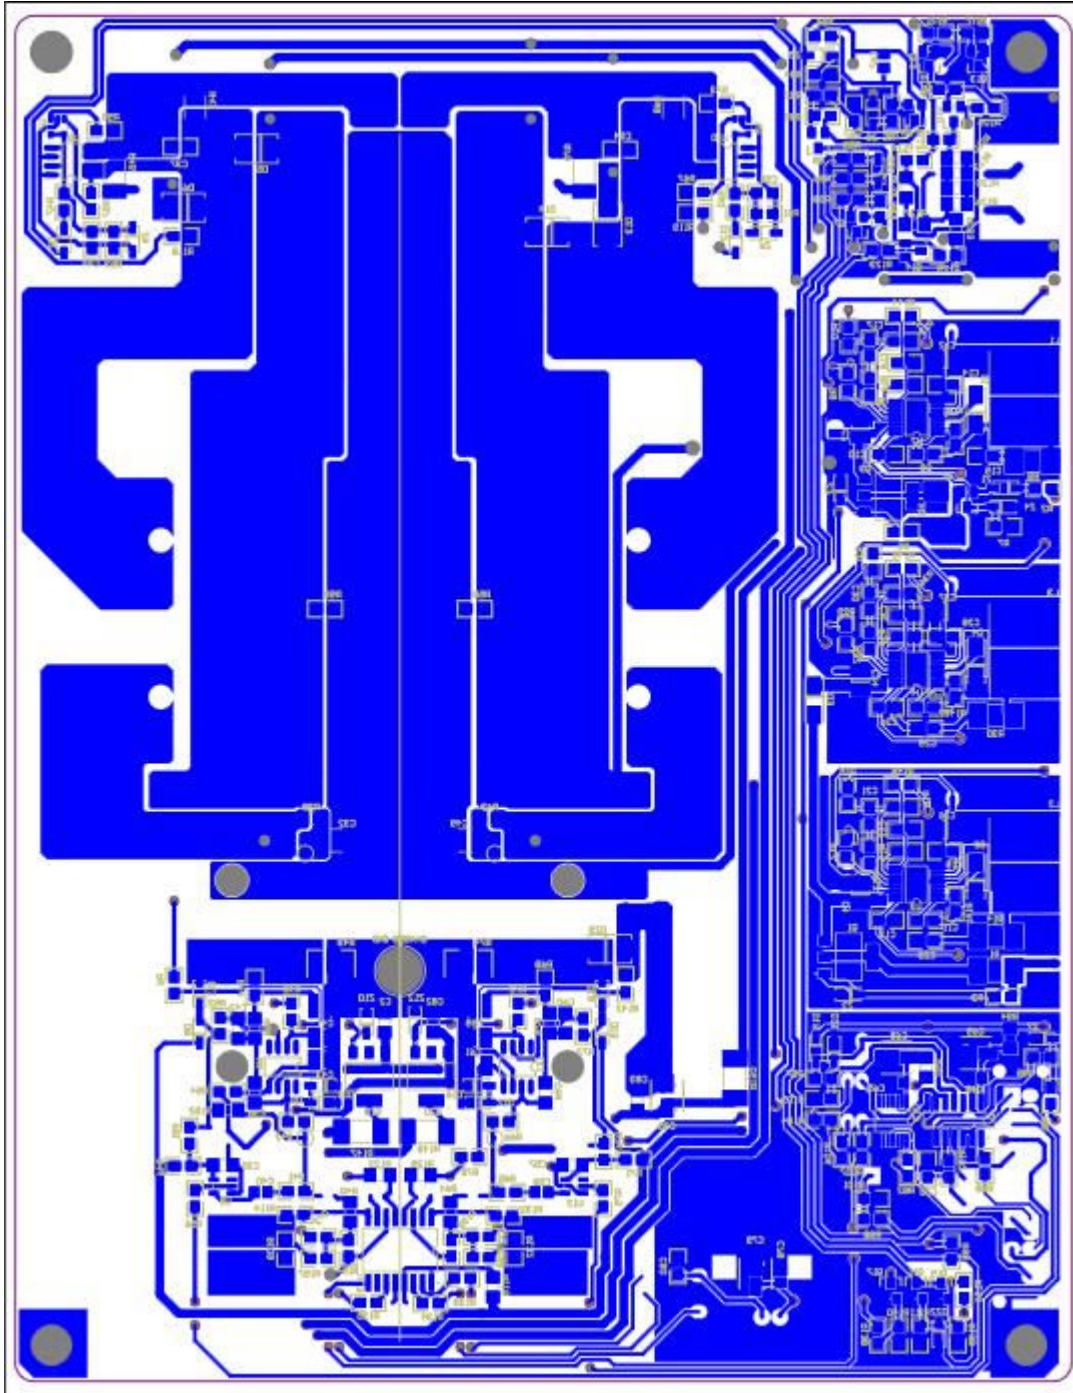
IRAUDAMP6 Mother board PCB Bottom Layer (Top View)
